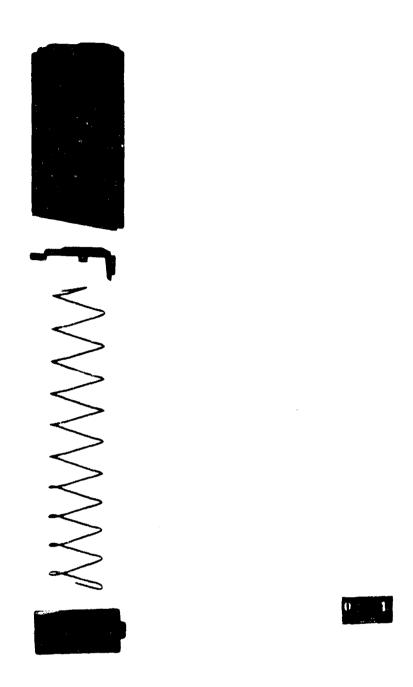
Disassembled View of Test Magazine (Type 1B) Showing (TOP to BOTTOM) the Magazine Body, Follower, Follower Spring, and Floor Plate.
